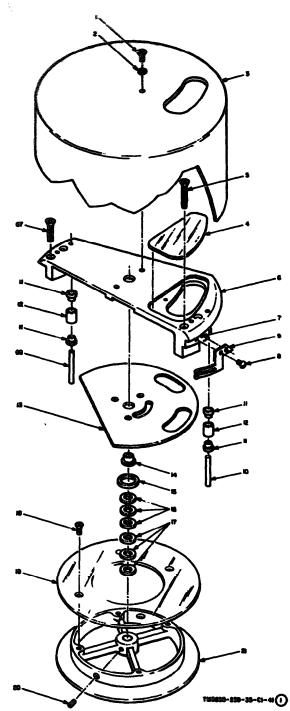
Sound recorder set magazine MA-27/ASH exploded view (part 1 of 3).
